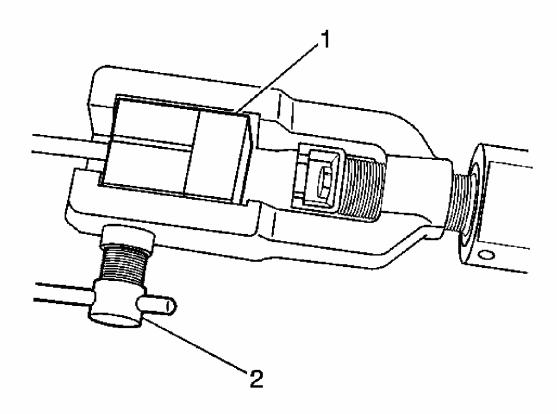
View Of Clamping Screw & Unused Die Courtesy of GENERAL MOTORS CORP.
